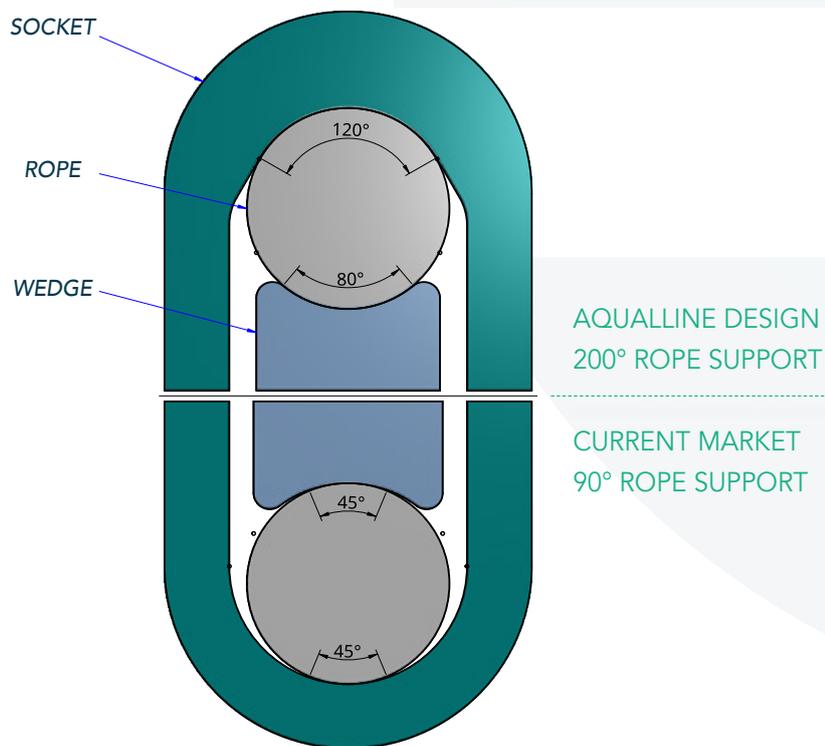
OUR SPECIAL WEDGE SOCKET DESIGN
